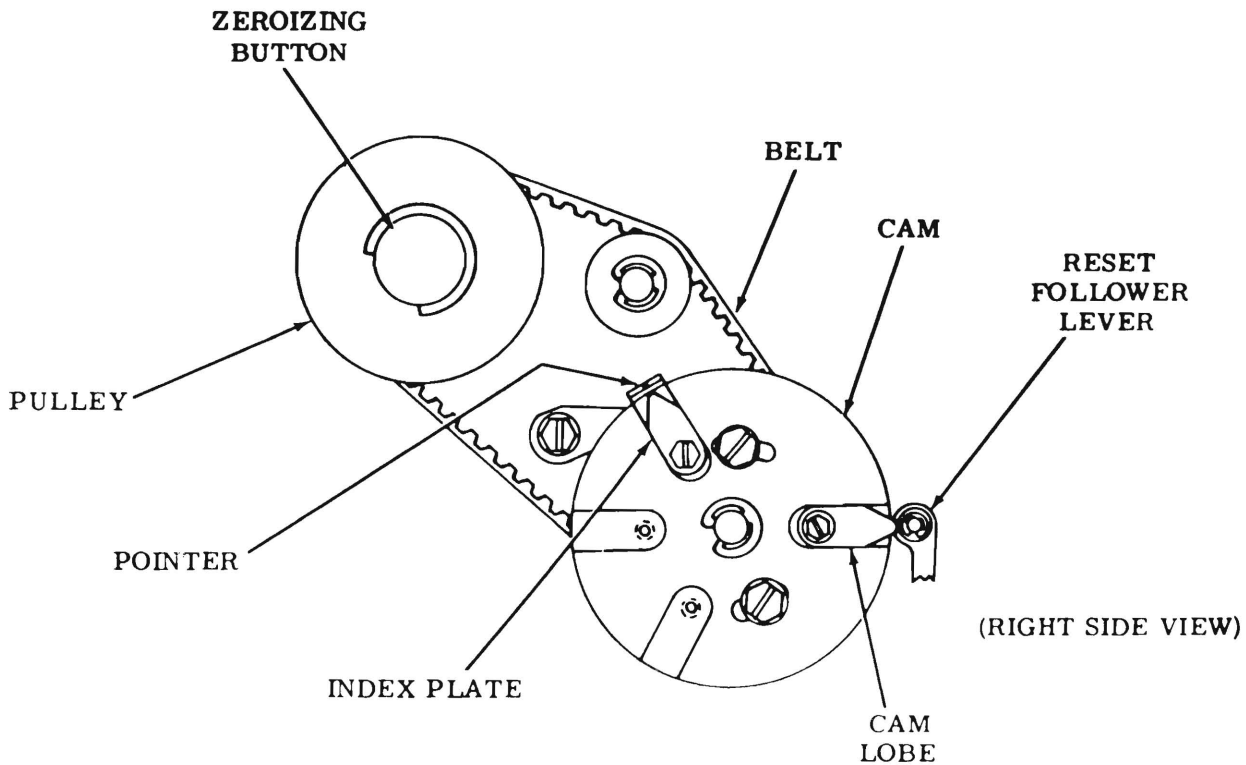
Zeroizing Position of Platen Drive Mechanism — One Cam Lobe Operation
